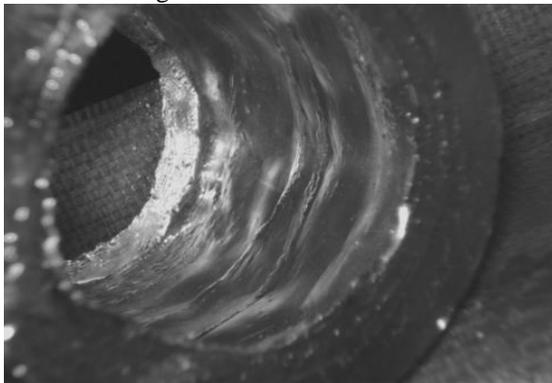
a Centrifugal Castings (size \varnothing 80, 120mm long) produced at a) 400 rpm
